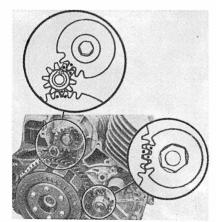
View of timing marks used on some clutch gears. Refer to text.
